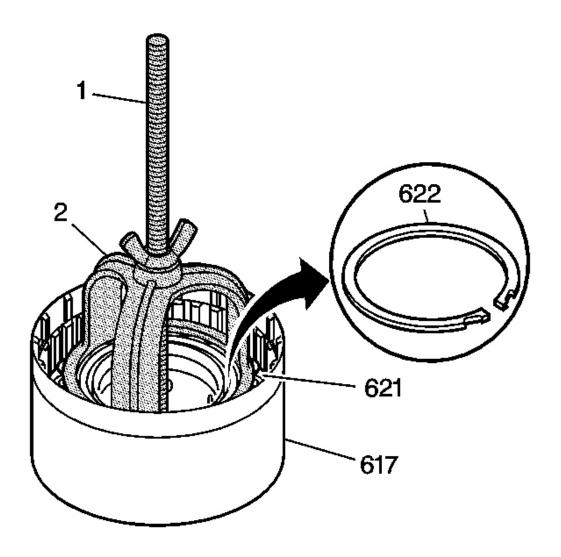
Using J 23327 & J 38734 To Compress The Second Clutch Piston Spring Courtesy of GENERAL MOTORS CORP.
